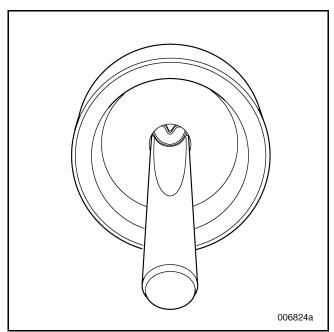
Inserting Teflon<sup>®</sup> Seal Installer/Sizer (Tool No. J 47358)
